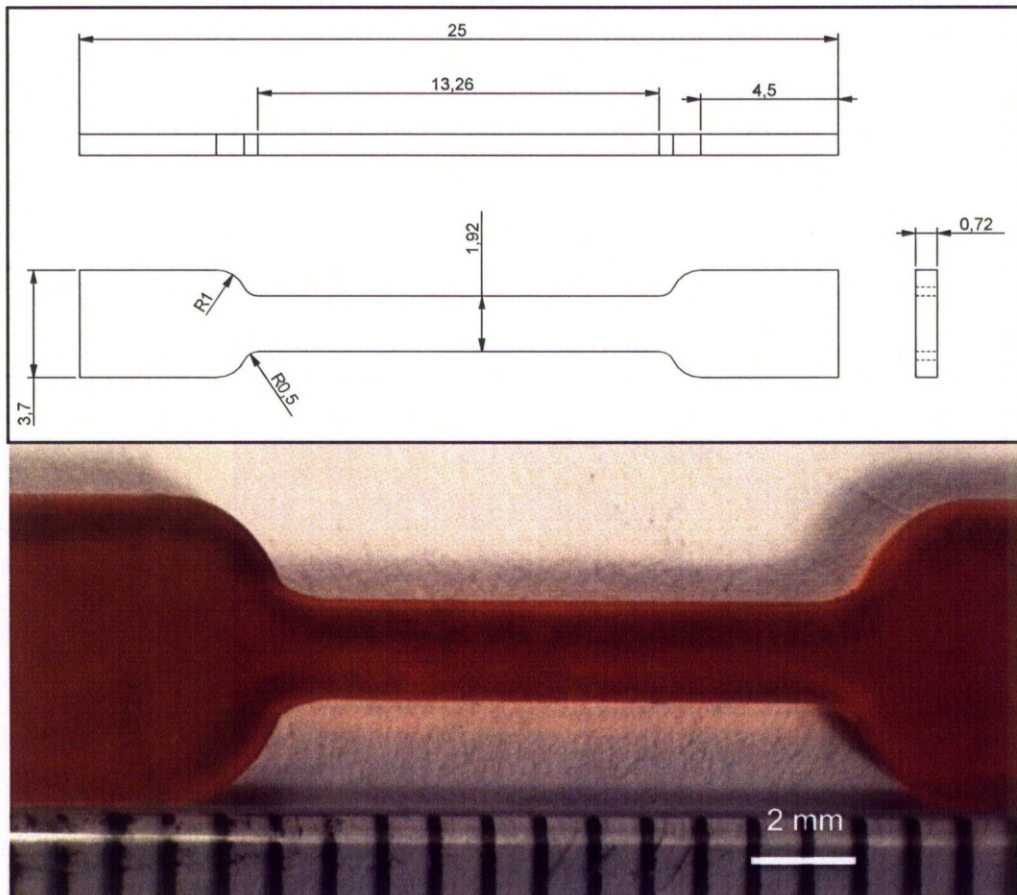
Dimensional Details and Manufactured Primary Tensile Test Specimen (Before Testing) Adopted Form Type 5B, BS EN ISO 527-2:1996
